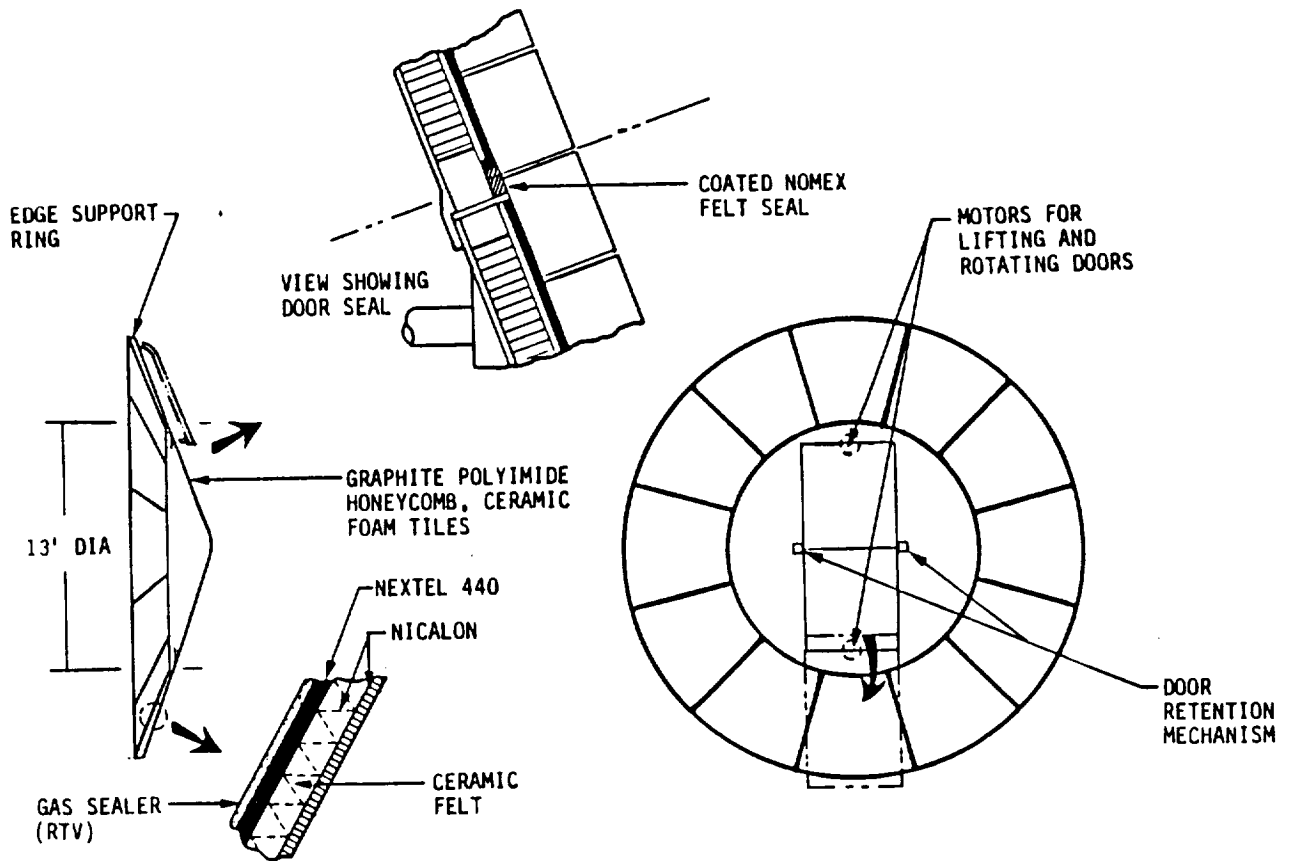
Aerobrake TPS and Engine Cover Mechanism
